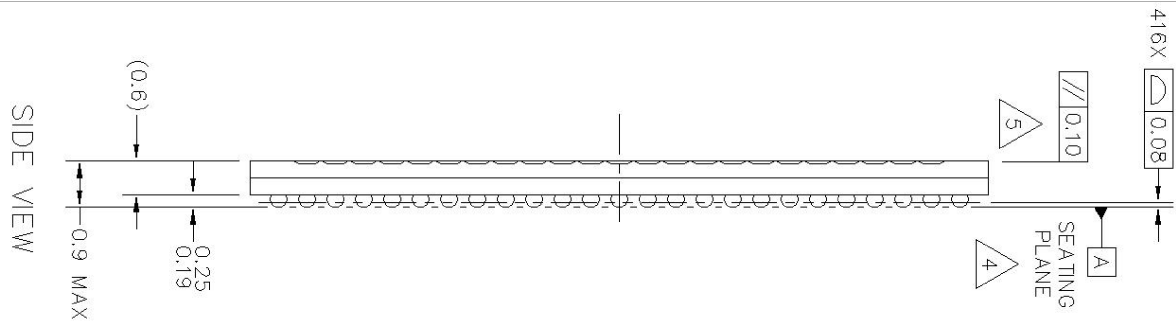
416 MAPBGA 13x13 mm Package Side View
